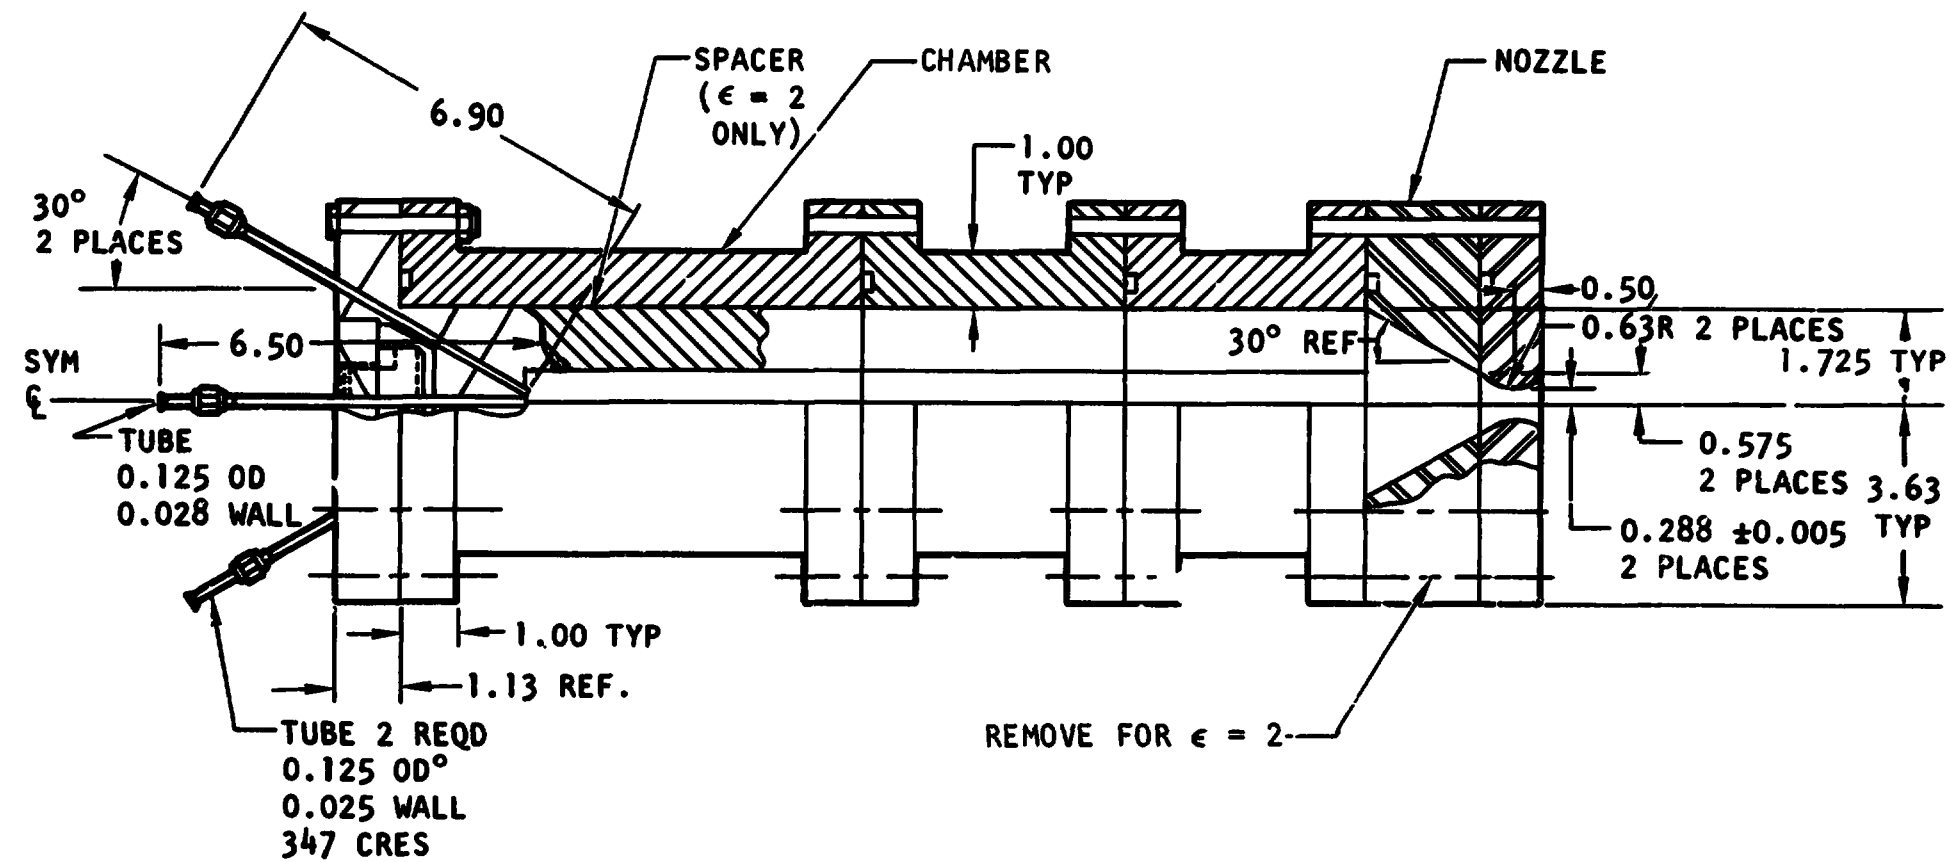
Overall Assembly of Test Engine, Injector and Nozzle Assembly
